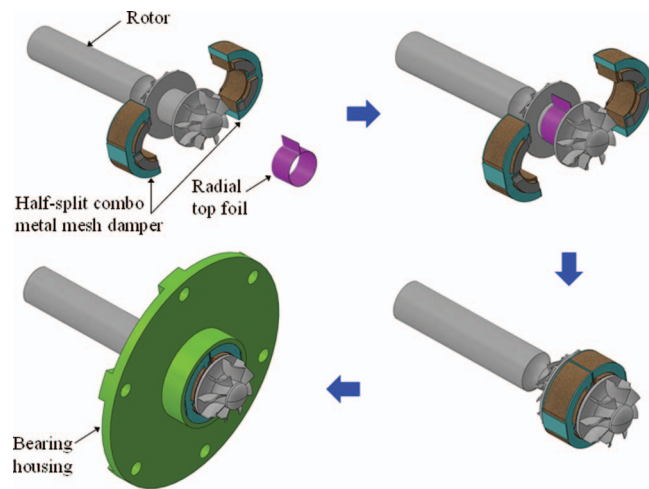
Assembly process of half-split-type radial-thrust combo MMFB and rotor.
